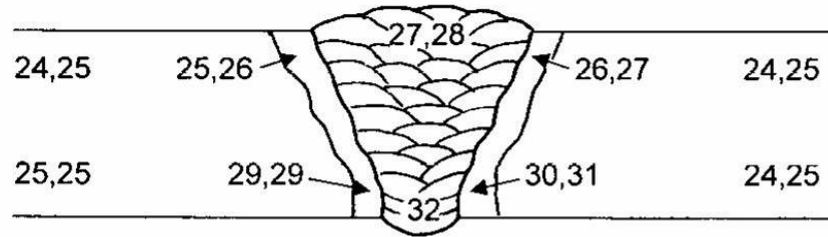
18mm thick GTAW weld in Zeron 100 showing high hardness in the root.
